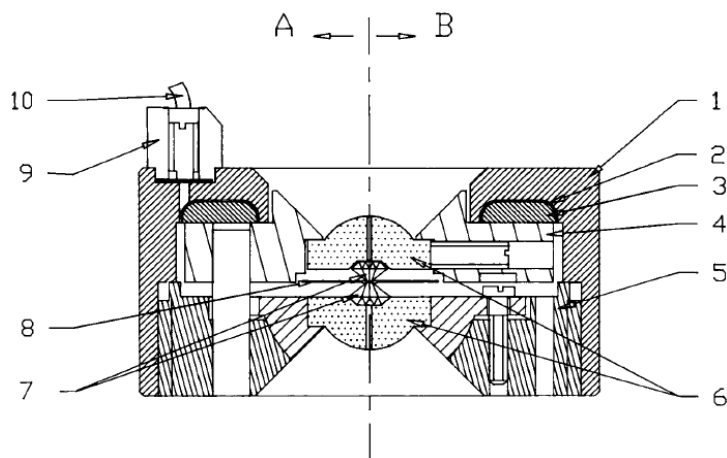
Half cuts of the Membrane Diamond Anvil Cell for X-ray, MDACX: (A) through the locating pins; (B) through the alignment screws. (1) retaining nut; (2) membrane; (3) push-piece to transmit the thrust to the piston; (4) piston; (5) lower platen; cell body; (6) beryllium seats; (7) diamond anvils; (8) gasket; (9) biconical connection with micro-valve; (10) capillary tubing. The diameter of the cell is 50 mm and its height is 25 mm [35].
